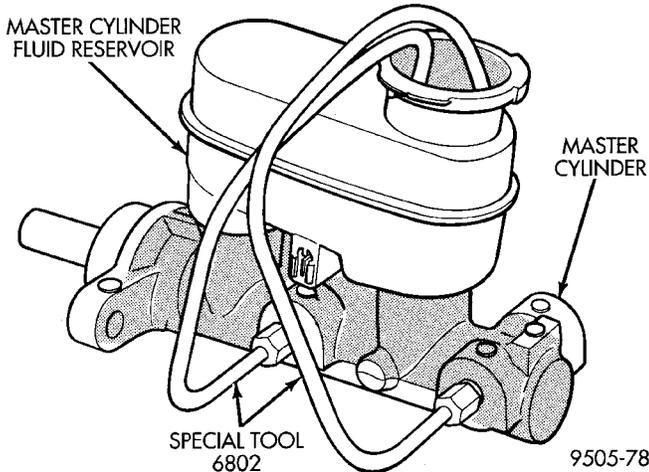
Bleeding Tubes Attached to ABS Master Cylinder
